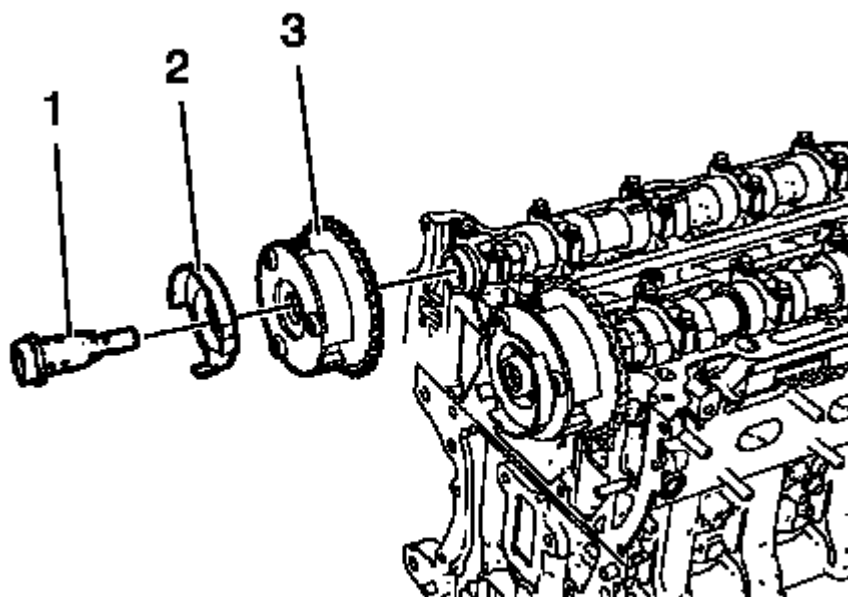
Intake Camshaft Sprocket, Bolt And Intake Camshaft Position Exciter Wheel
